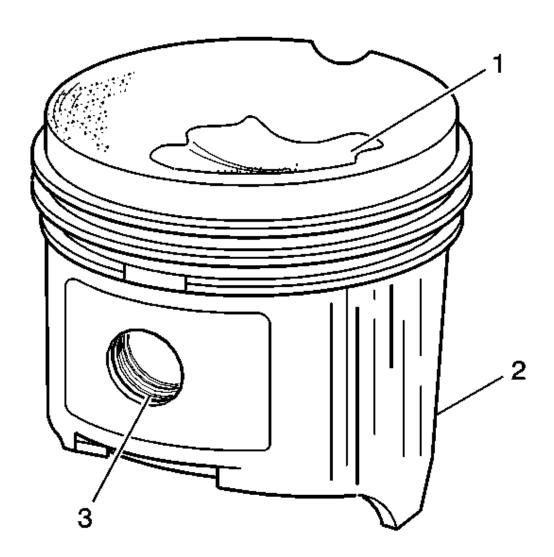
Identifying Piston Damage Inspection Areas Courtesy of GENERAL MOTORS CORP.
